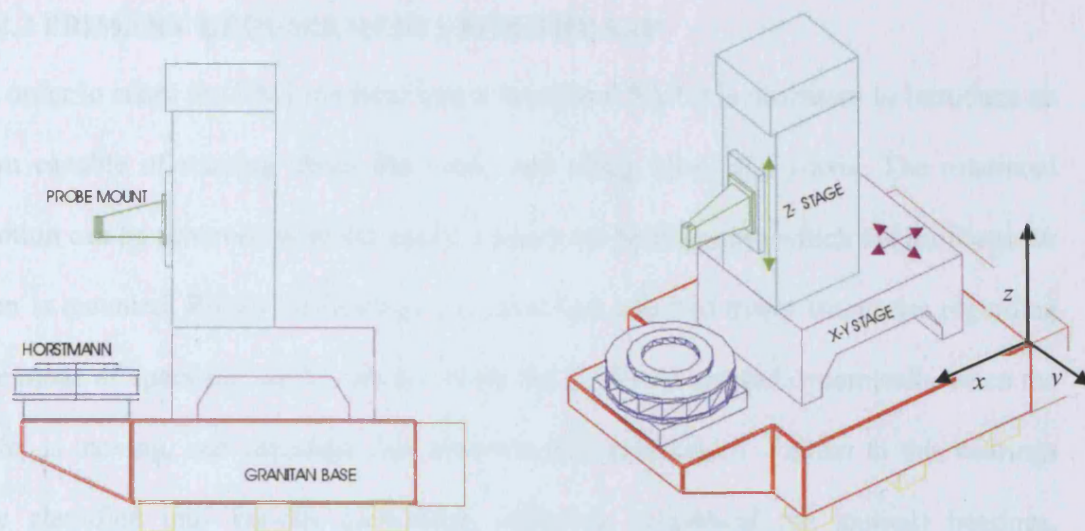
CAD drawings of the FAG machine (drawings produced by C. W. King, UCL)
